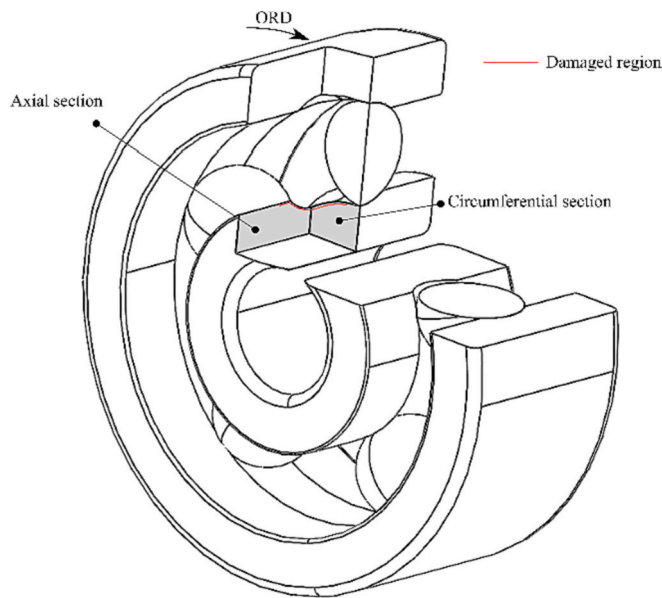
Schematic showing the axial and circumferential sections of a bearing.
